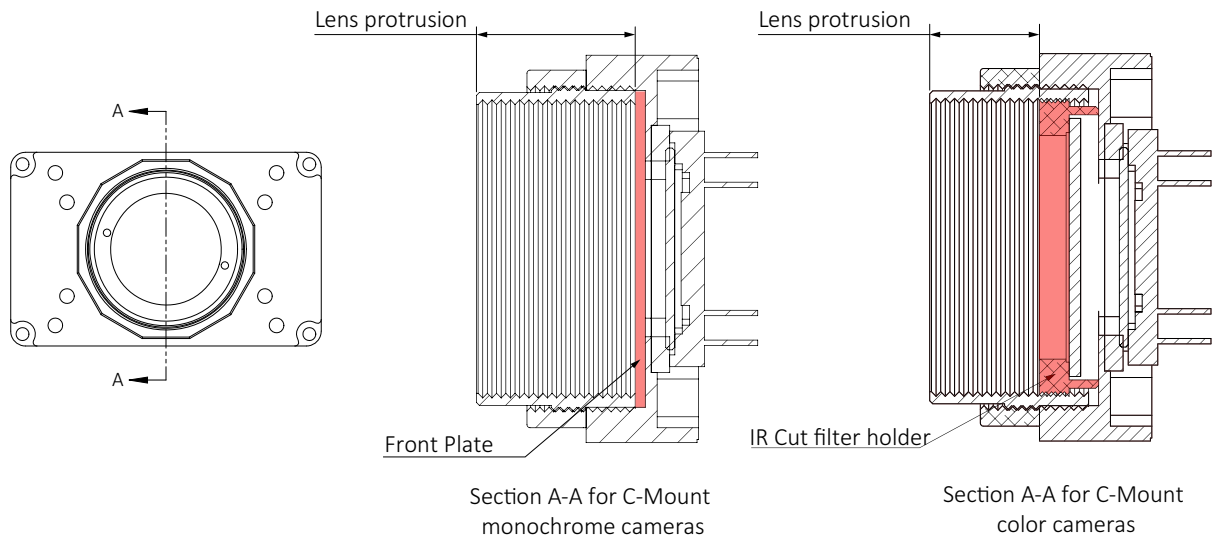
Cross section of typical Prosilica GT camera front assembly with C-Mount
